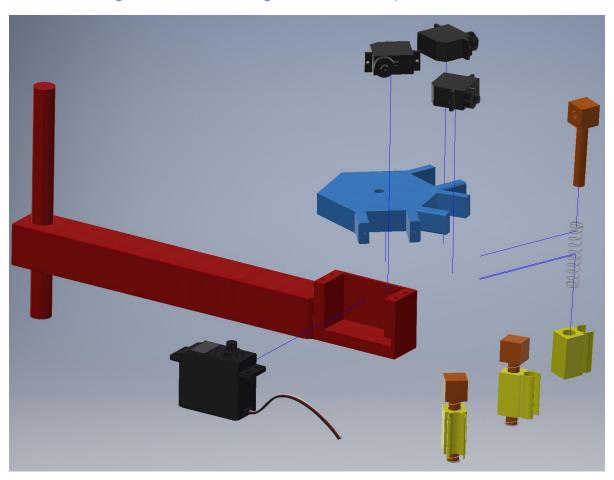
SCARA Robot Arm Segment 2 and Pen Actuator/Pen Holder Exploded View
